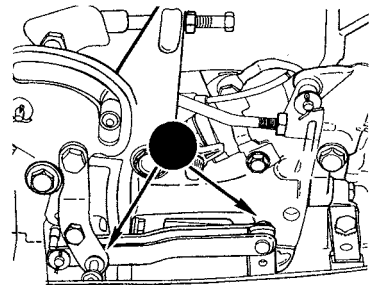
Shift and throttle shaft greasing points for 55WML two cylinder (737cc) motors
